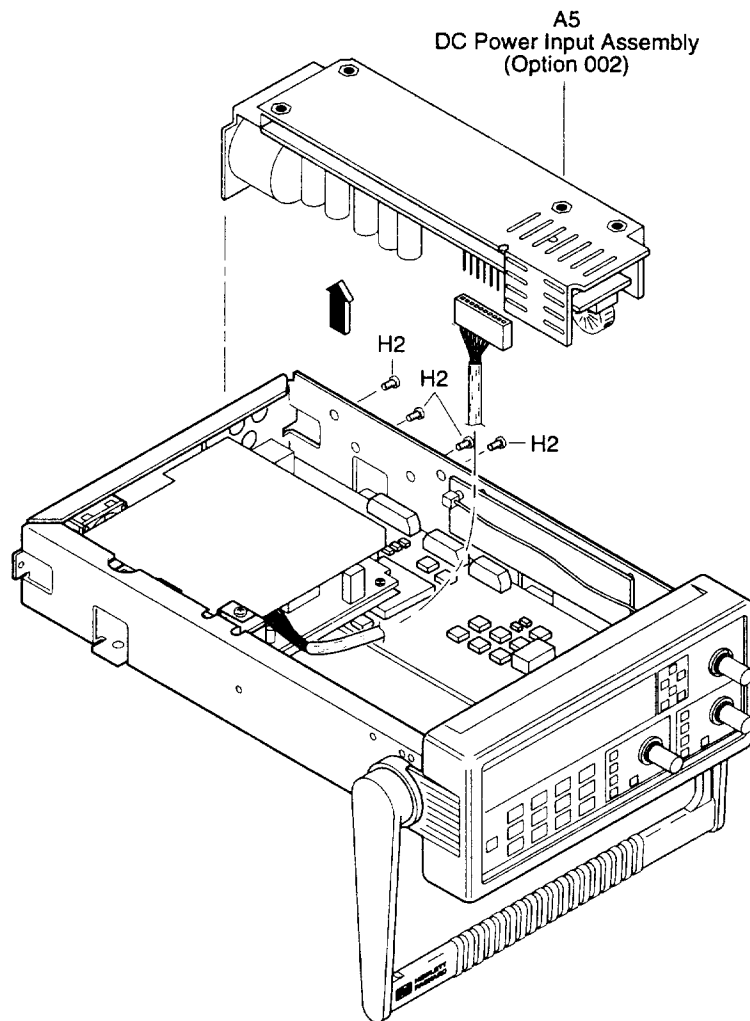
DC Power Input Assembly (Option 002) Removal
